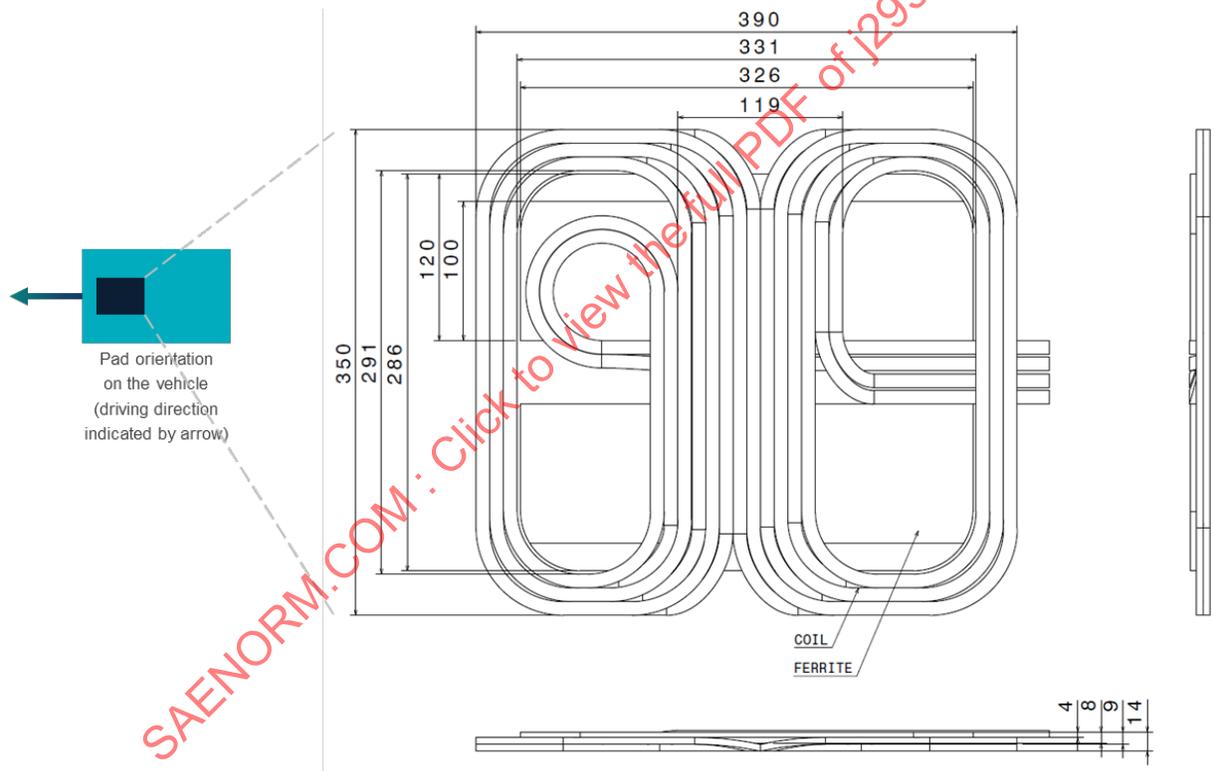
Mechanical dimensions of the Product VA WPT2/Z3
